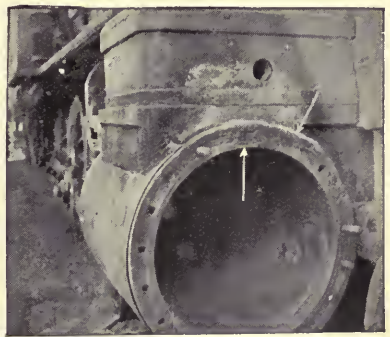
Repair by autogenous welding cost £3, 10s. It only remains to smooth the weld.
